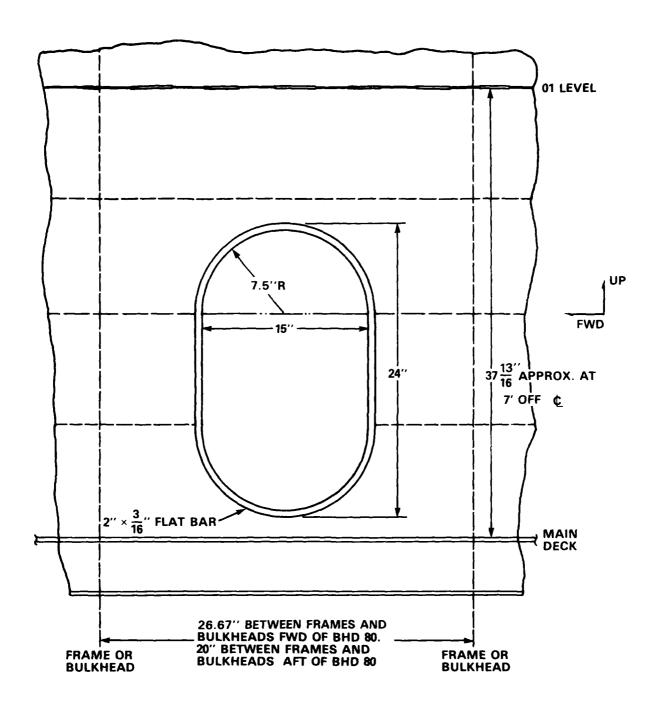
Typical Deckhouse Side Access Hatch Opening
